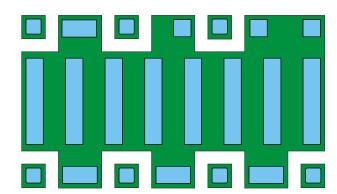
Solder Mask Superposed on Solder Stencil. (top view)
